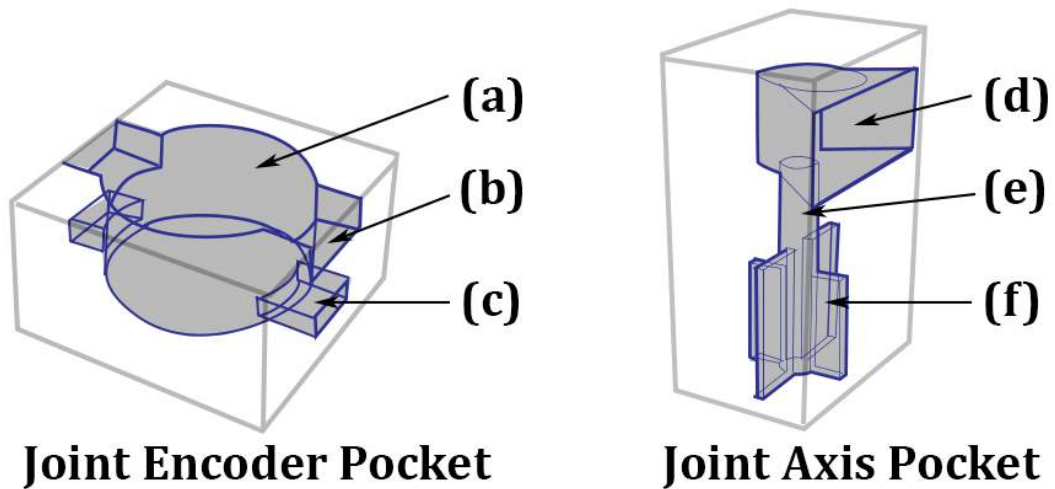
(a) Encoder void, (b) Encoder bracket mount point, (c) Installation access tunnel, (d) Friction bolt void, (e) Encoder shaft pocket, (f) Roll pin pocket
